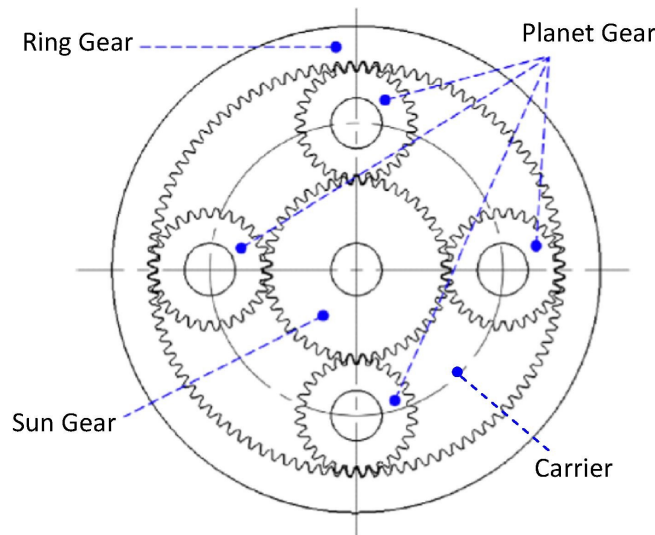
Schematic of a planetary gear set with four planet gears [1]
